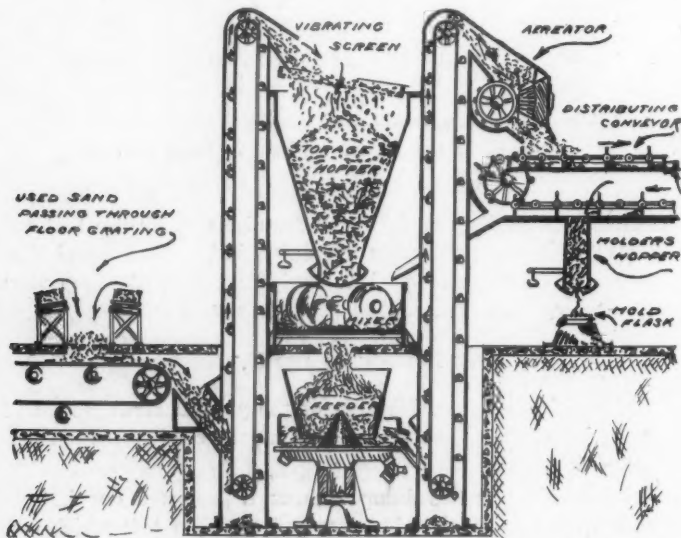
THE NEW METHOD OF HANDLING MOLDING SAND.
